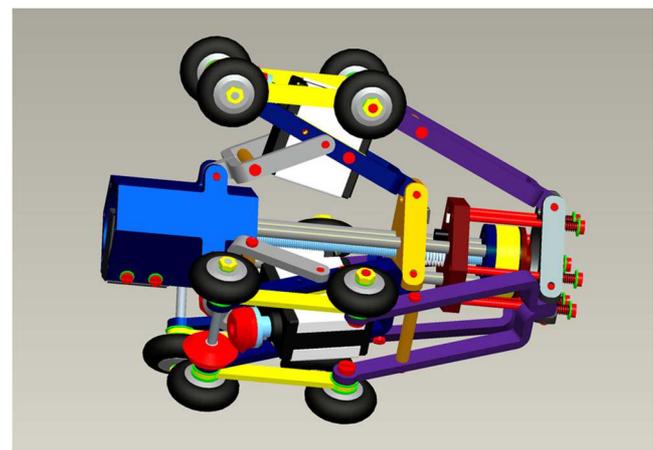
Final design of wheeled machine with adjustable wheels CEREVKA
